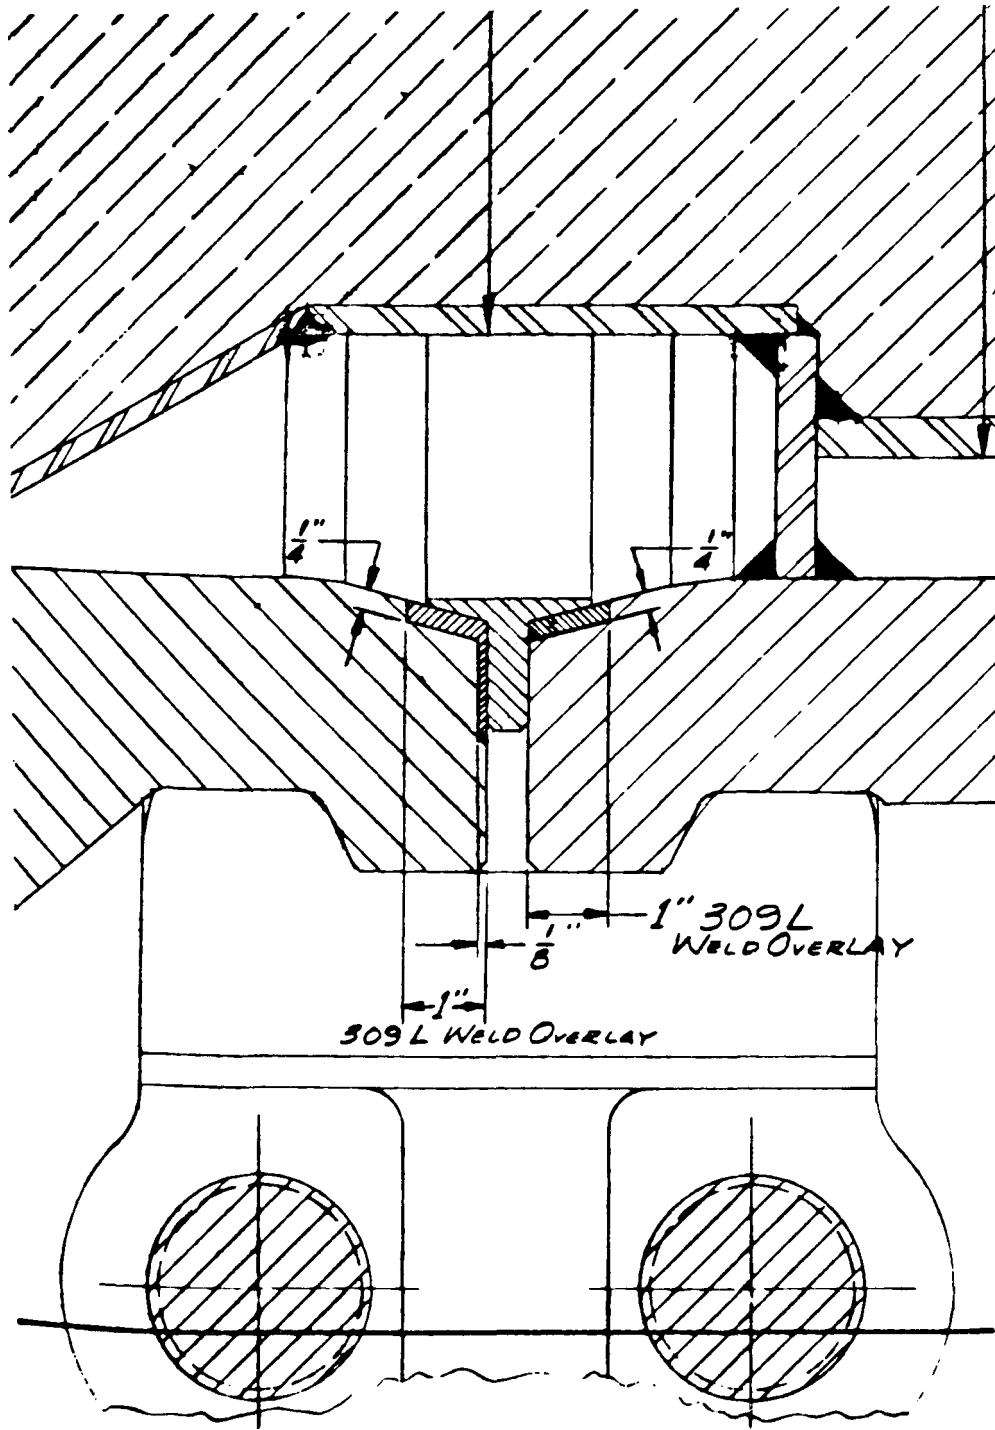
DETAIL OF STAINLESS STEEL WELD OVERLAY ON 24-INCH GRAYLOC FLANGE ON START-UP HEATER
